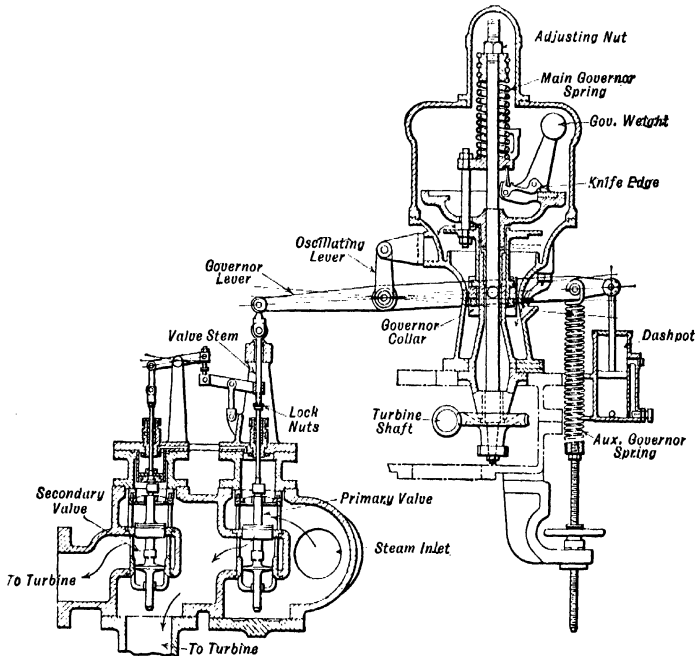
Governor and Direct Connected Valve Gear for Westinghouse Turbine.
